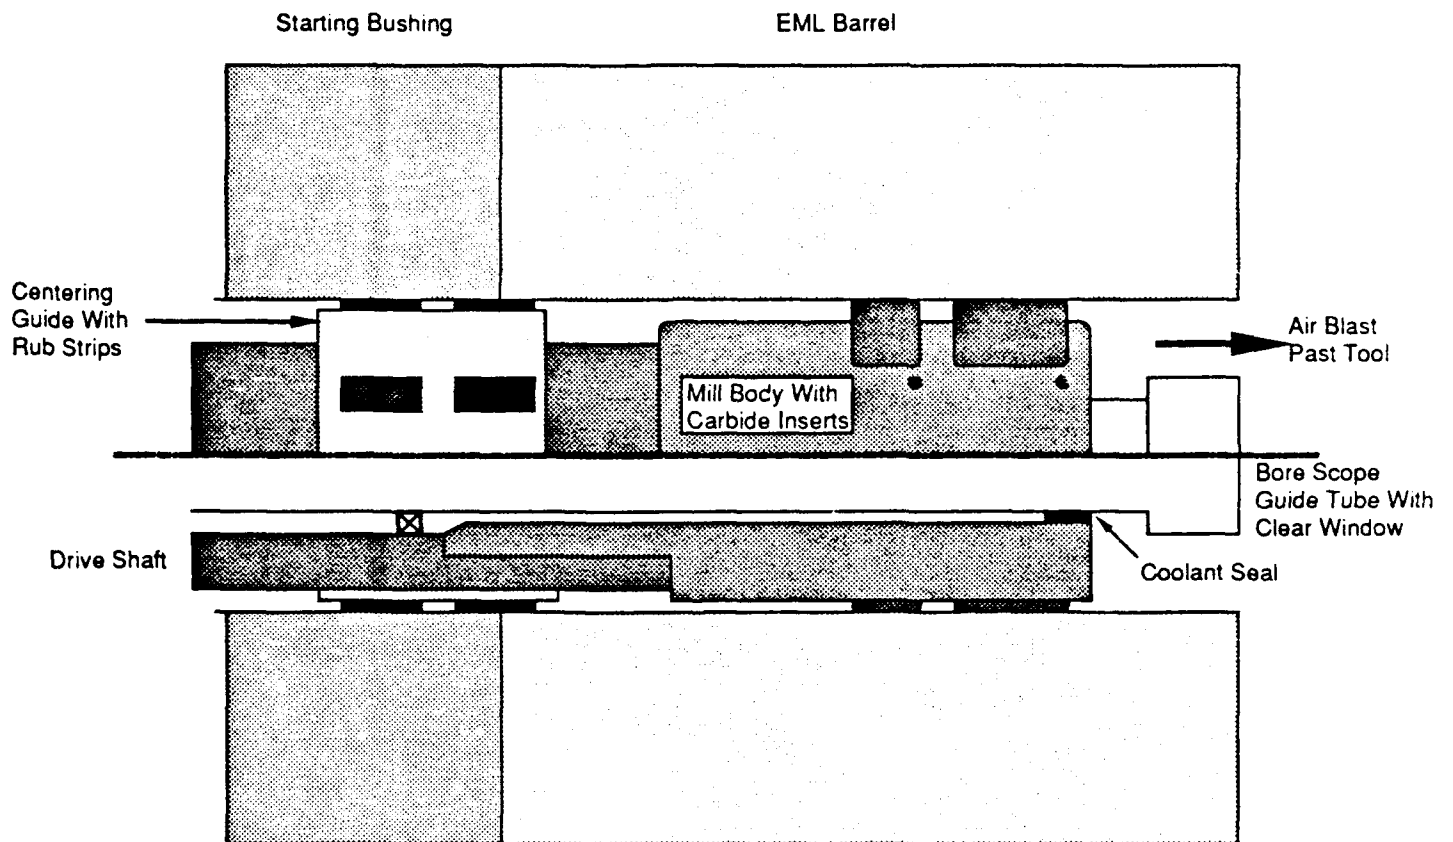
Cross-section schematic of starting bushing, EML barrel and reaming tool.
